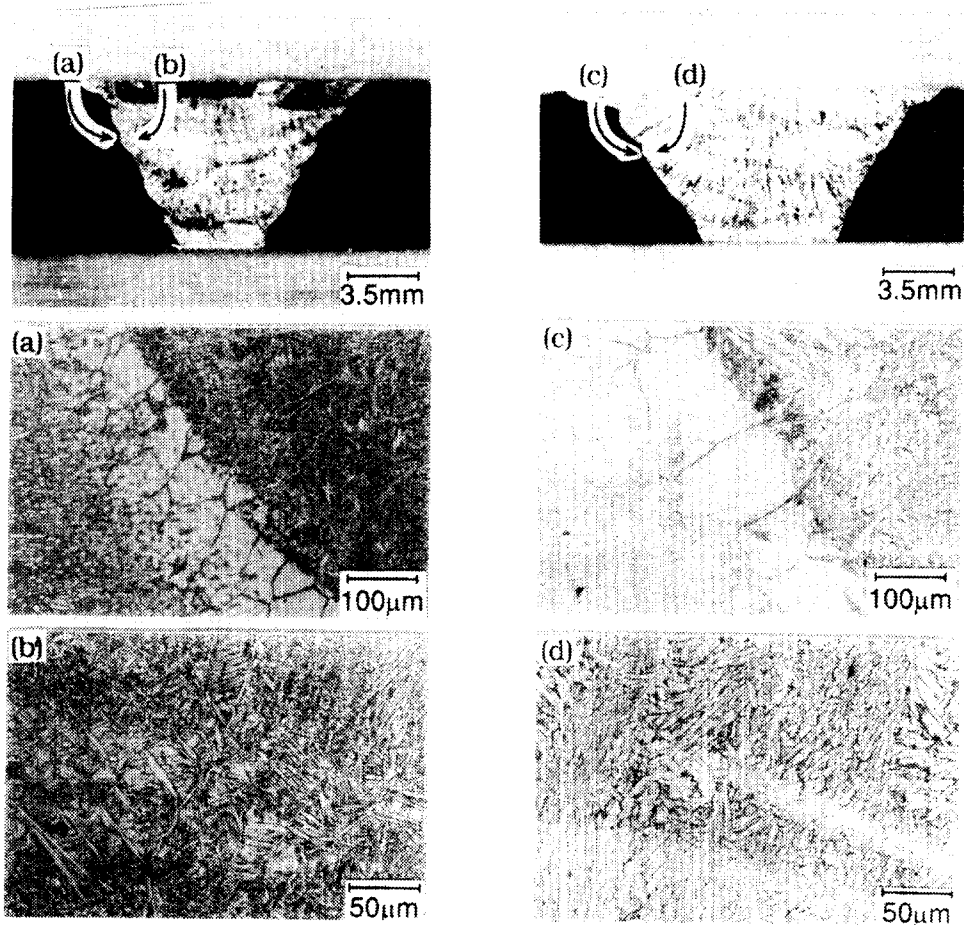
Optical micrographs of weld metal and heat-affected zone. Left : GTAW, Right : SMAW
